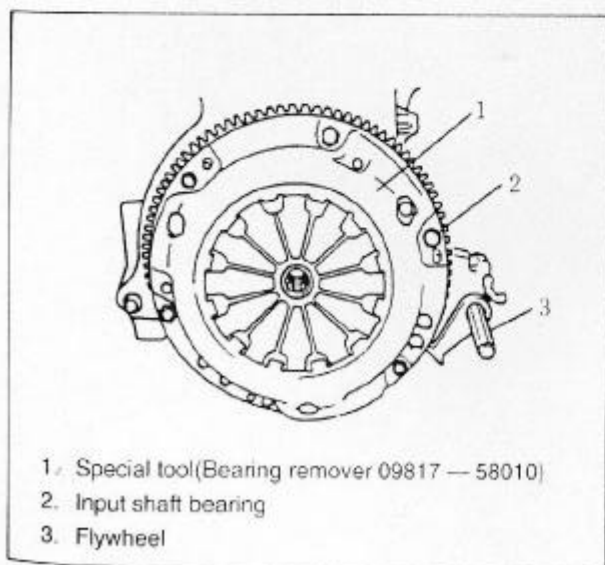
B — 7 DISASSEMBLING CLUTCH COVER
